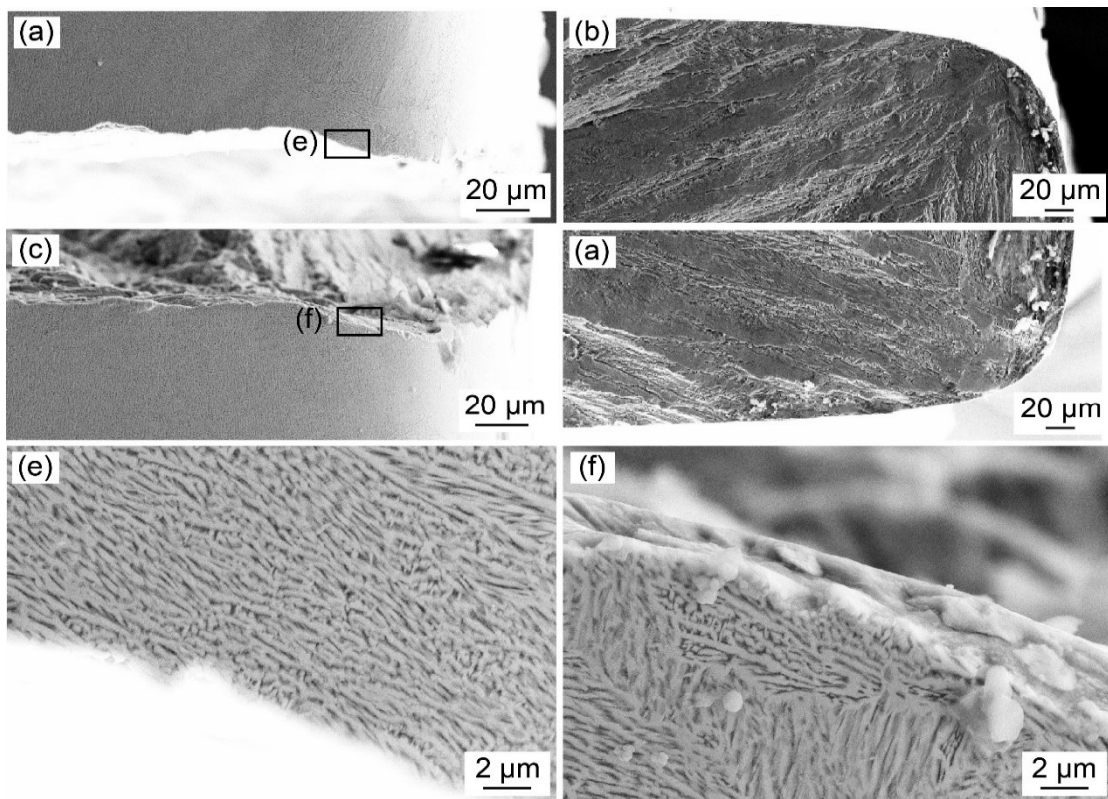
The crack initiation location of specimen aged at 630 °C for 3 h. The side views (a) and (c) and the fractographies (b) and (d) of the crack initiation location. (e) and (f) The high magnification images of the places marked in (a) and (c).
